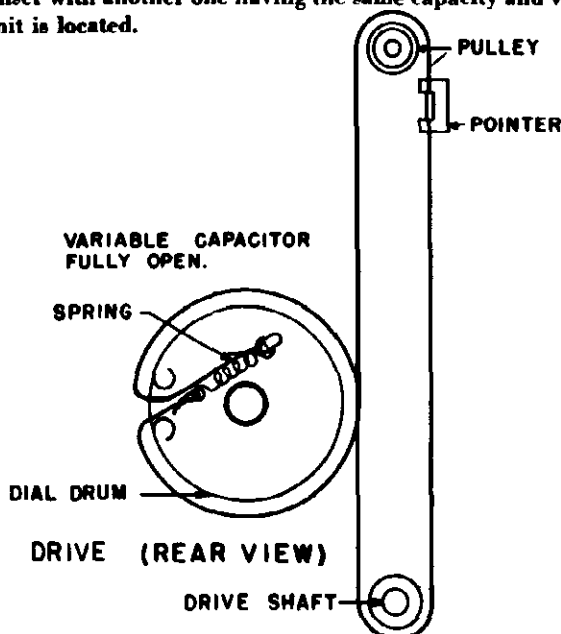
DIAL CORD DRIVE (REAR VIEW)
